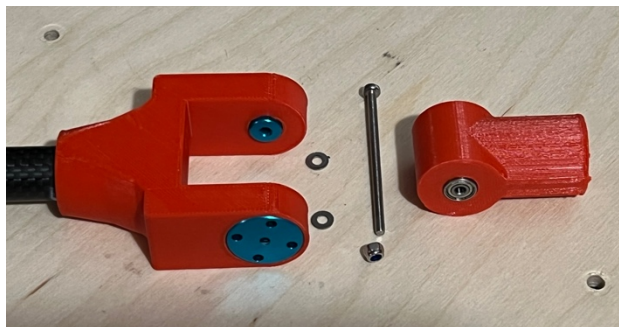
Arm joint components. The upper link of the arm Section shown in the RHS of the Figure contains 3 mm internal diameter ball bearing races. This joint assembly is held within a fork on the LHS which makes use of aluminum flanges. These are used to support the shaft and interface to the bearings because of their superior mechanical properties over plastic. An M3 bolt is used to locate the bearing assembly to the fork and to firmly secured it using a nylon locknut. Stainless steel washers are used between the flanges and the bearings to achieve suitable joint clearance.
